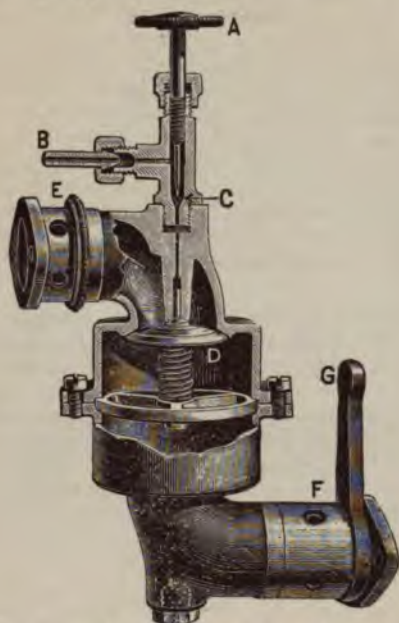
ONE OF THE ABEILLE CARBURETERS.
